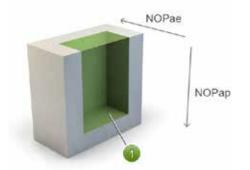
Milling of plain surface (Courtesy Walter Tooling)
